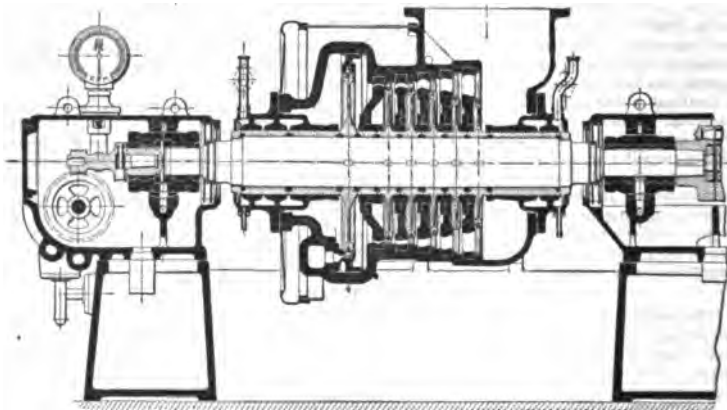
Ingersoll-Rand High-pressure Impulse Turbine.
